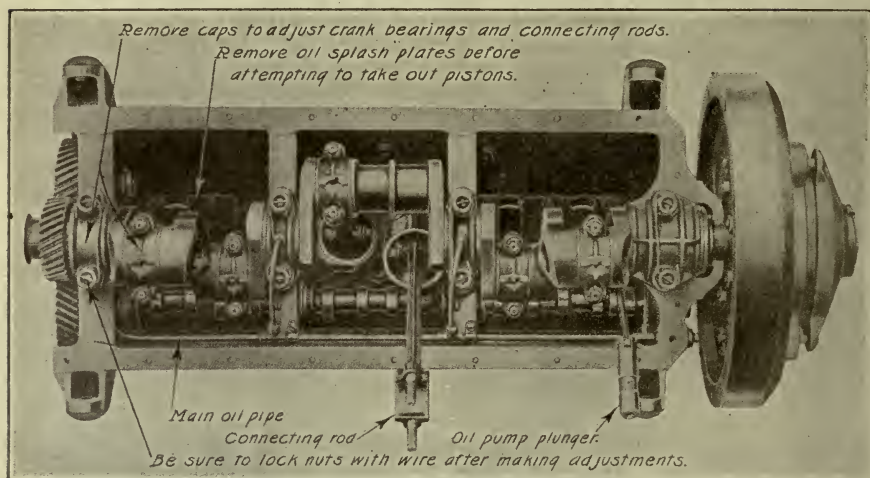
Adjusting Rod and Main Bearings (Reo).
